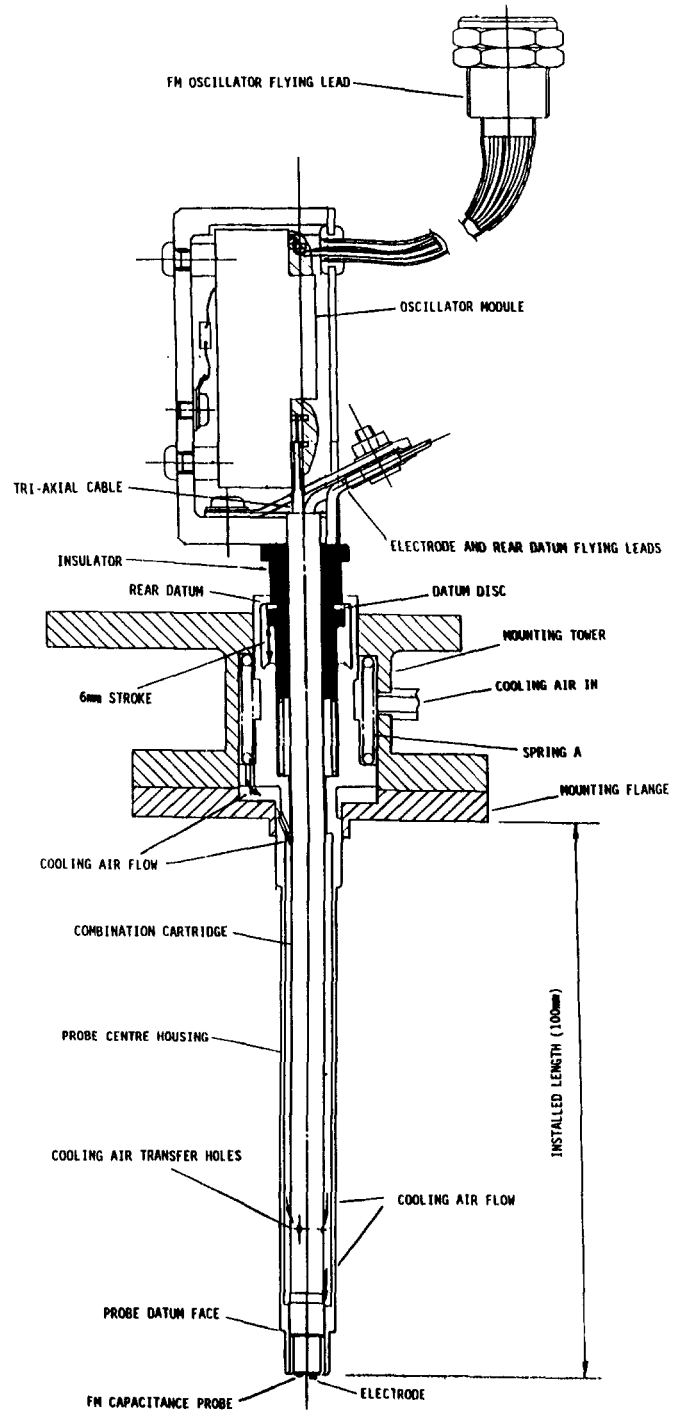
A 100 mm installed length, 6 mm stroke blade-by-blade SMP probe
